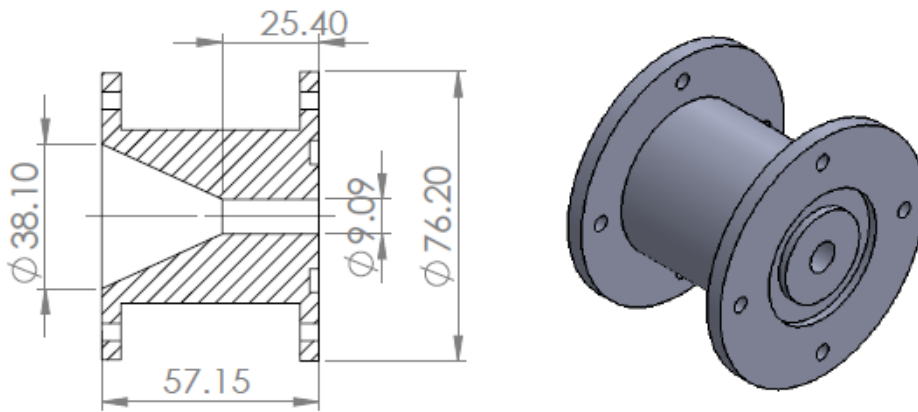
(Shows a 2D Drawing of The nozzle)
